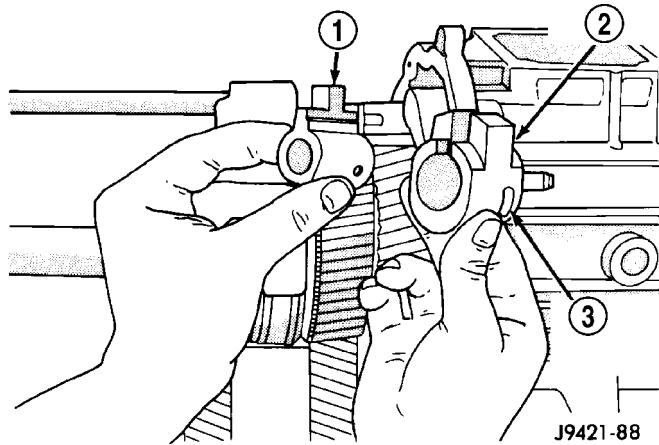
SHIFT SHAFT LEVER AND BUSHING
